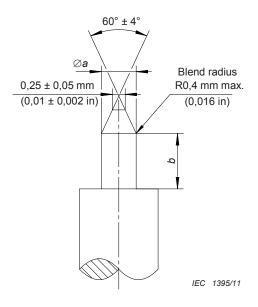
Gauge pins for socket-centre contact (for dimensions and notes, see Table 3)
